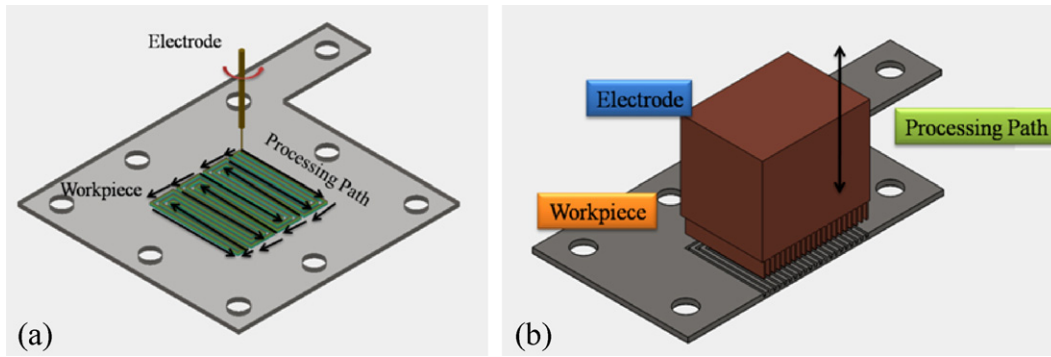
The tool piece electrodes and processing paths for (a) micro-EDM milling and (b) die-sinking micro-EDM.
